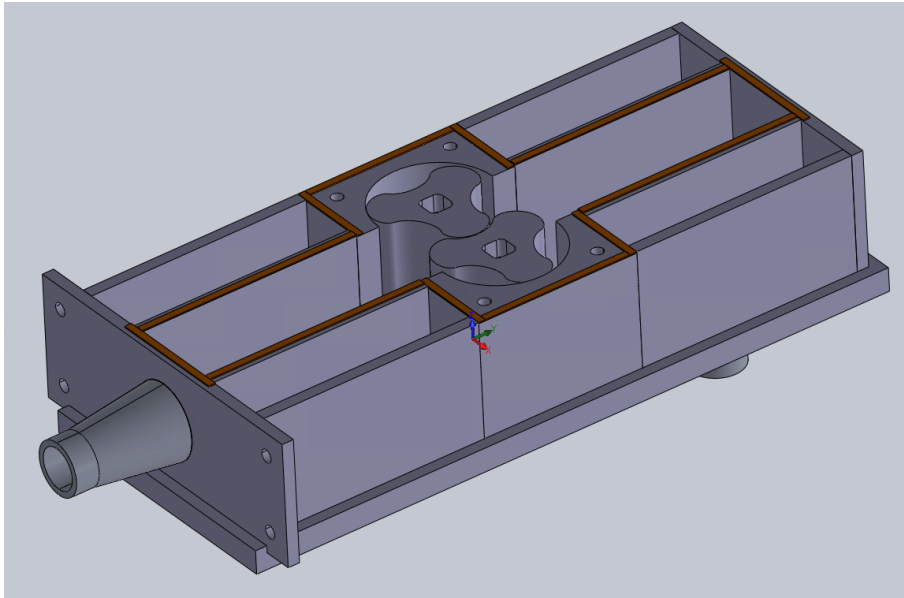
Complete setup of the CAD design by Chernoray. The illustration encompasses the epicycloidal lobe design used
